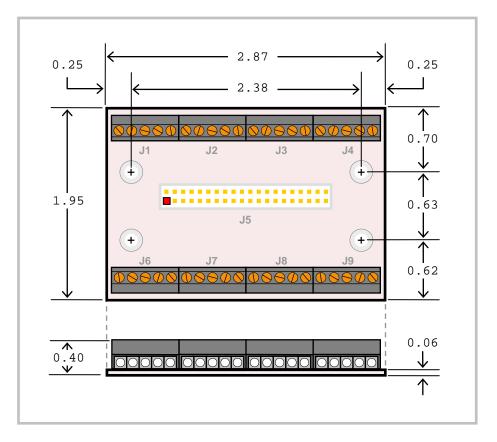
VL-CBR-4004 Dimensions and Mounting Holes (Not to scale. All dimensions in inches.)
